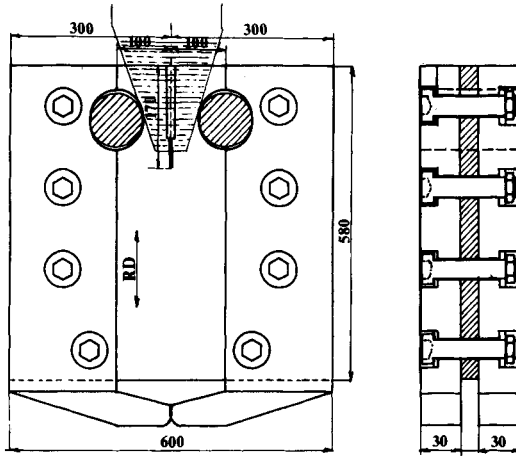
Wlsen - Specimen, Provided with Stiffeners Hinge
